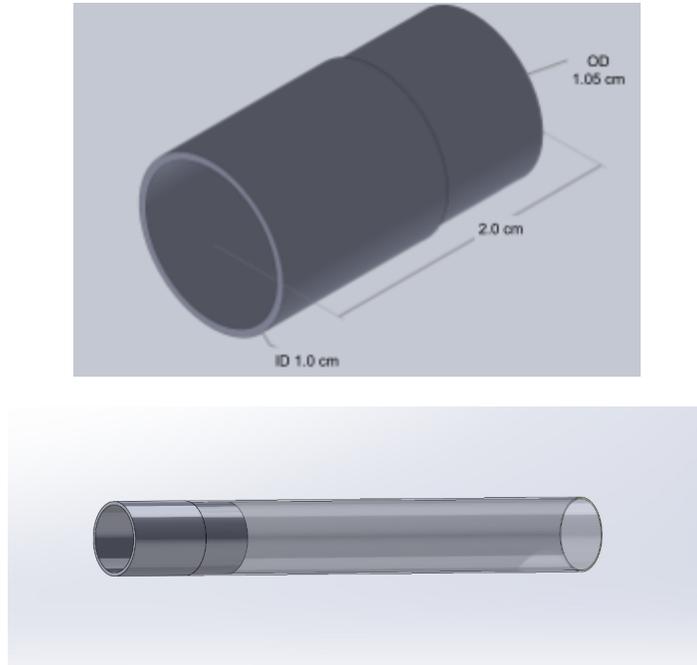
SOLIDWORKS model punch biopsy which includes circular tip; Full assembly of blade and tube.
